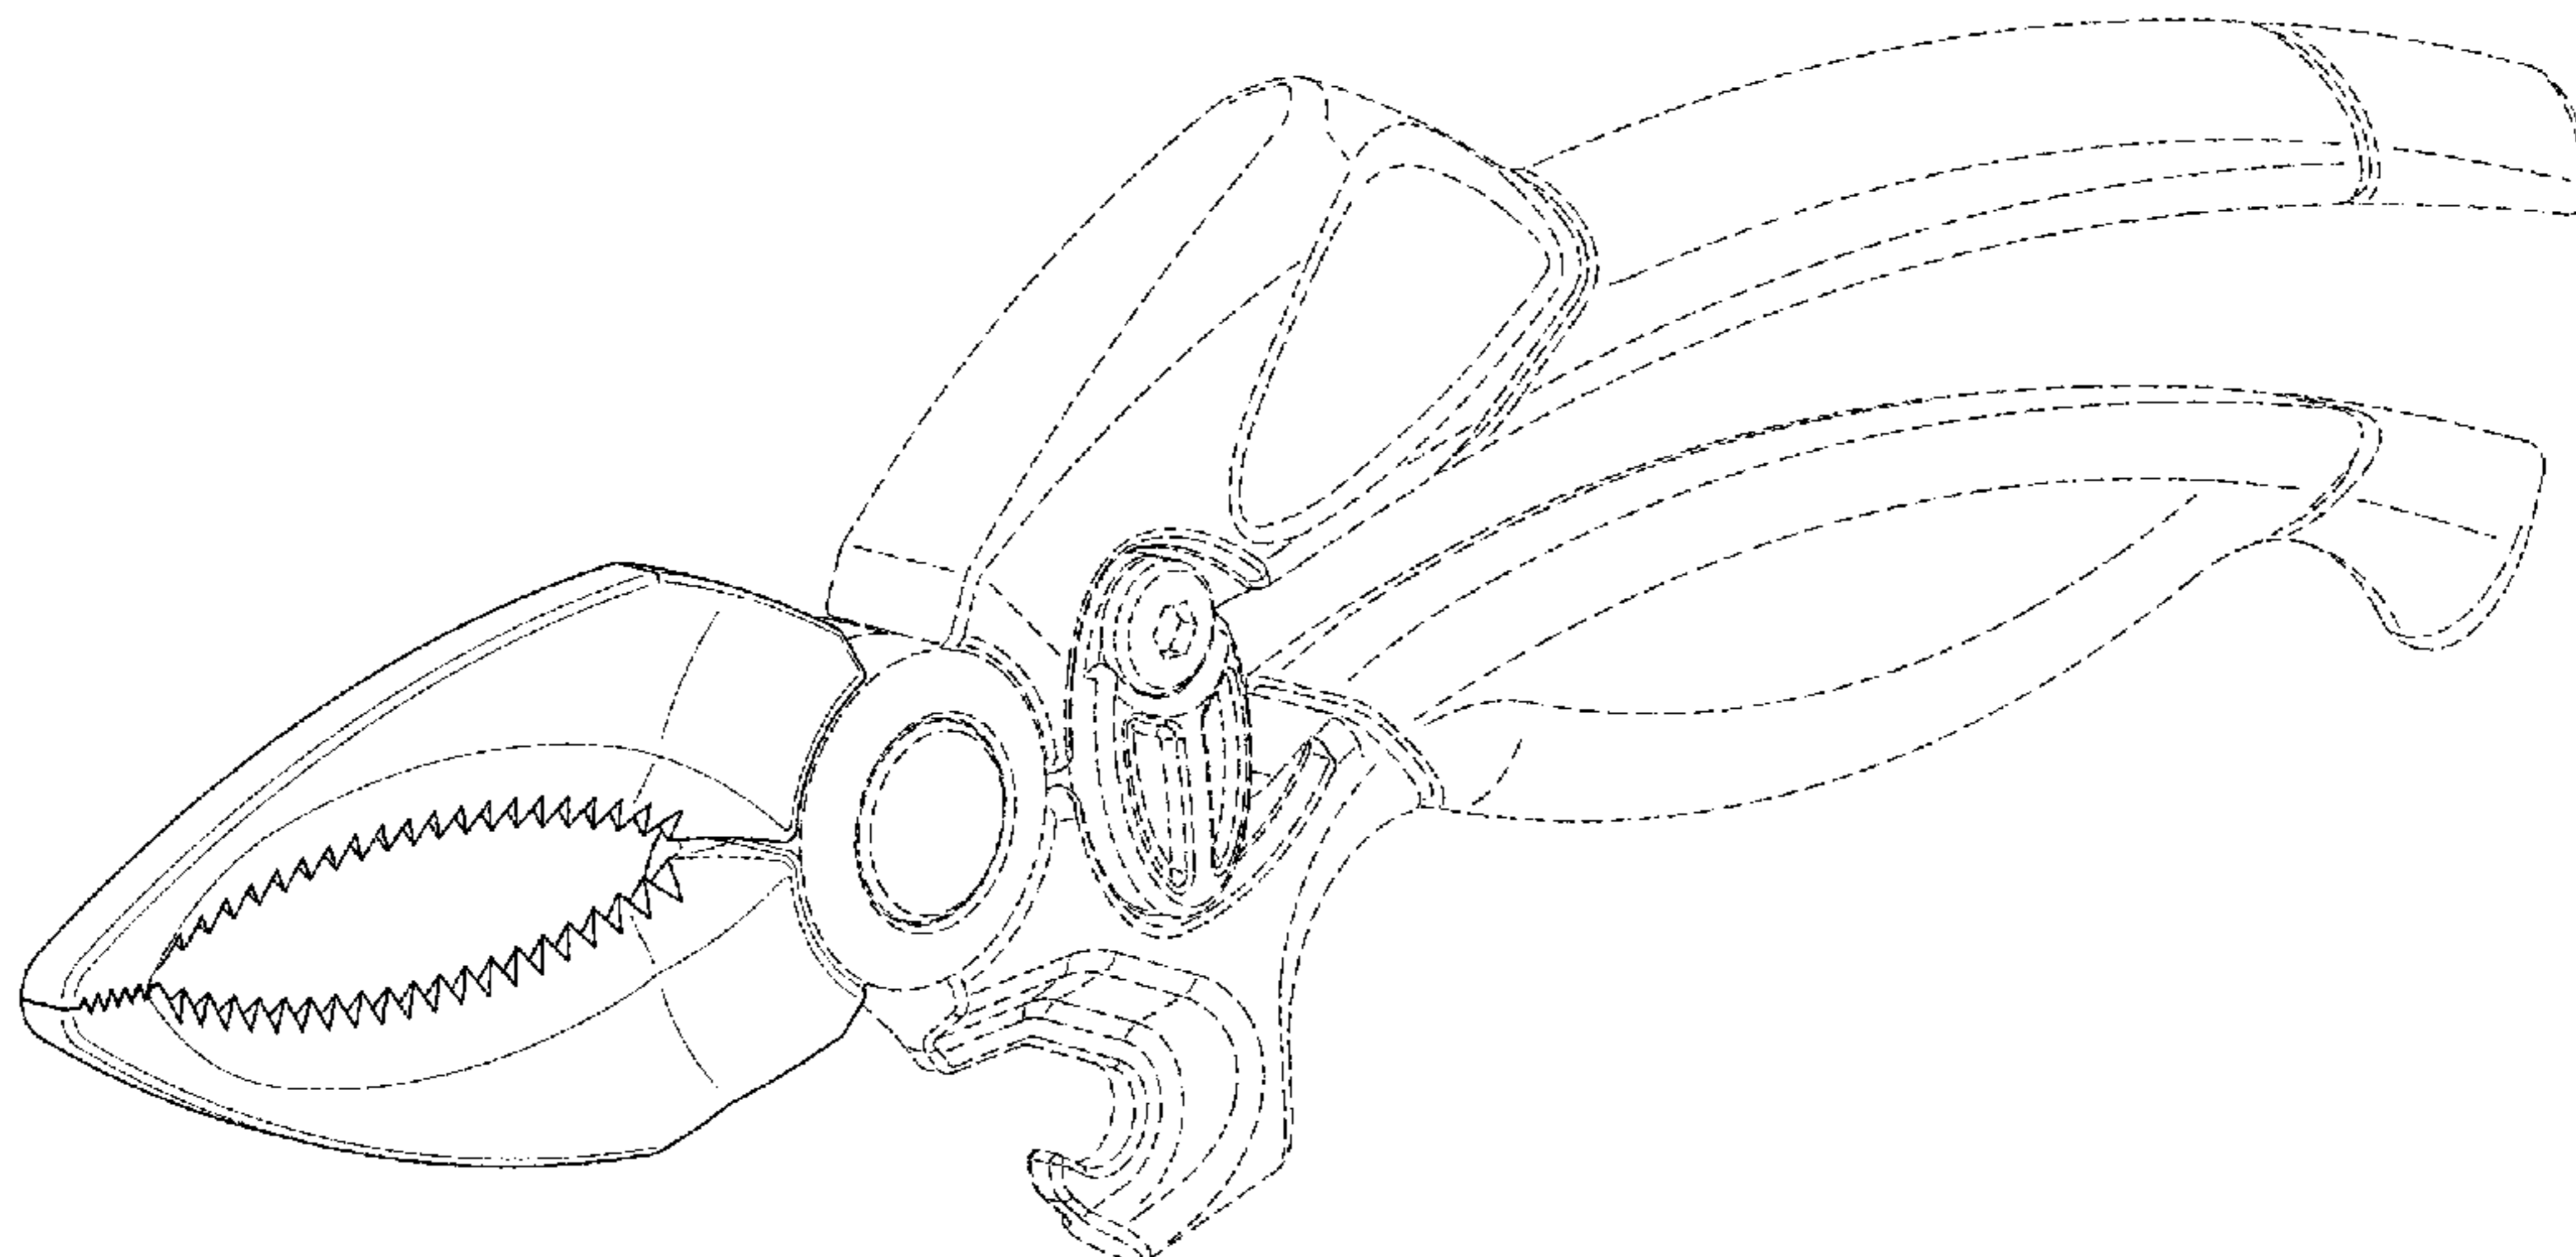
is a first side view of the crab shell cutter design of FIG. 1;
